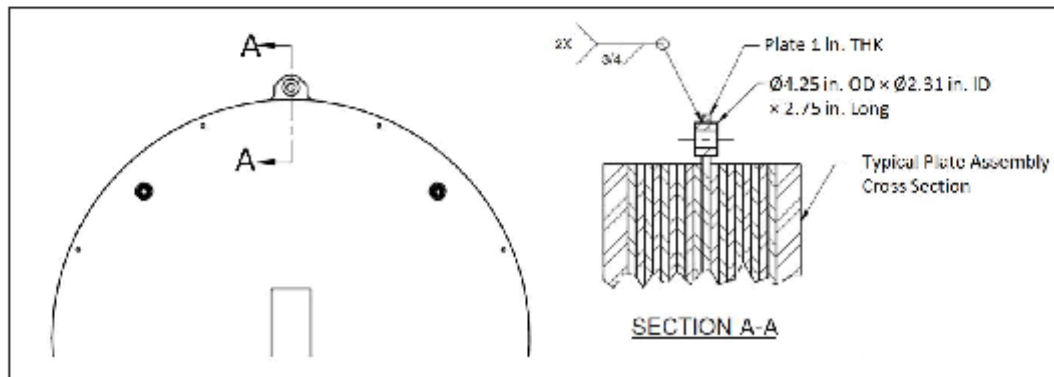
Typical Test Load Plate Assembly Lift Lug Design (Maximum Condition)
